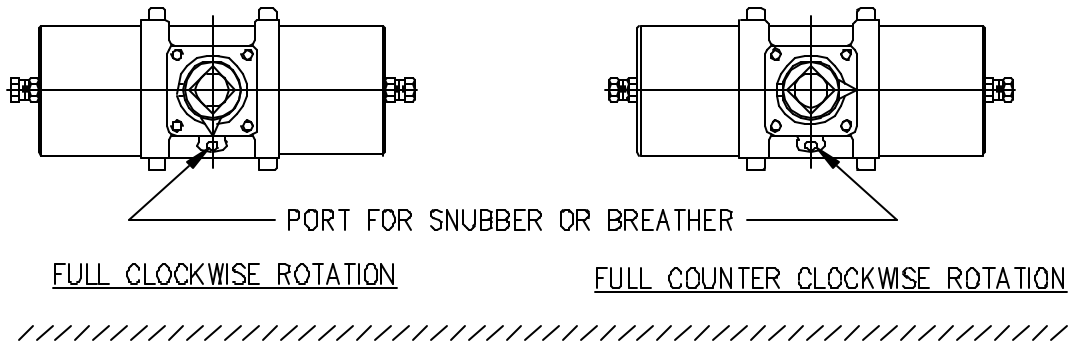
PISTON GEAR/RACK AND TORQUE PLUG ALIGNMENT FOR 301D-180°/ 301D-SR-180°
